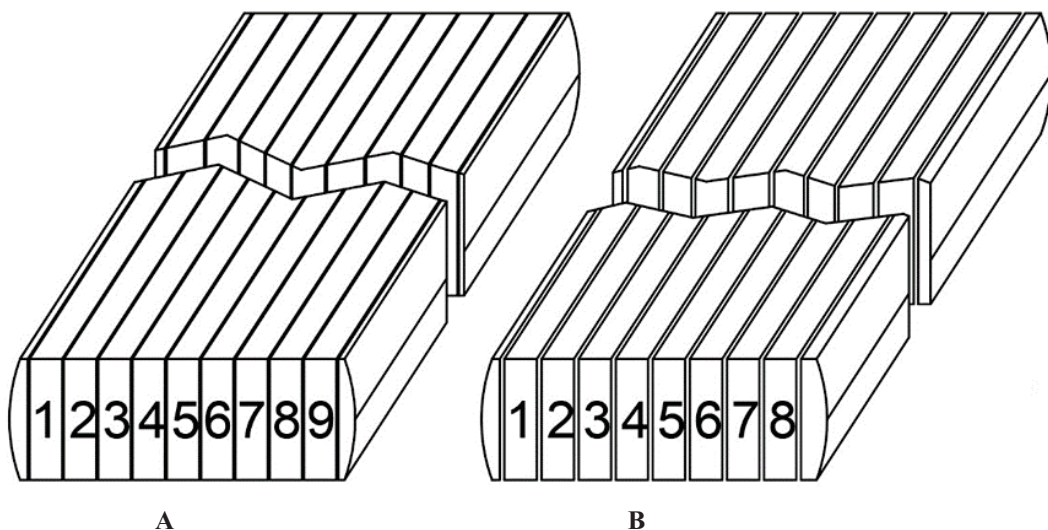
Cutting schemes of test specimens (A – band saw machine, B – circular saw machine)
